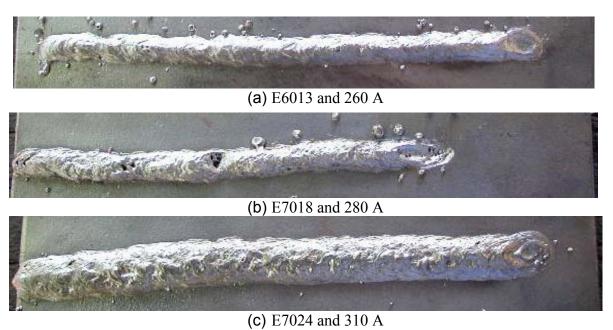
Pictures of the bead-on-plate wet welds deposited with the three electrode types using electrode positive on A36 steel plates at 50 m.
